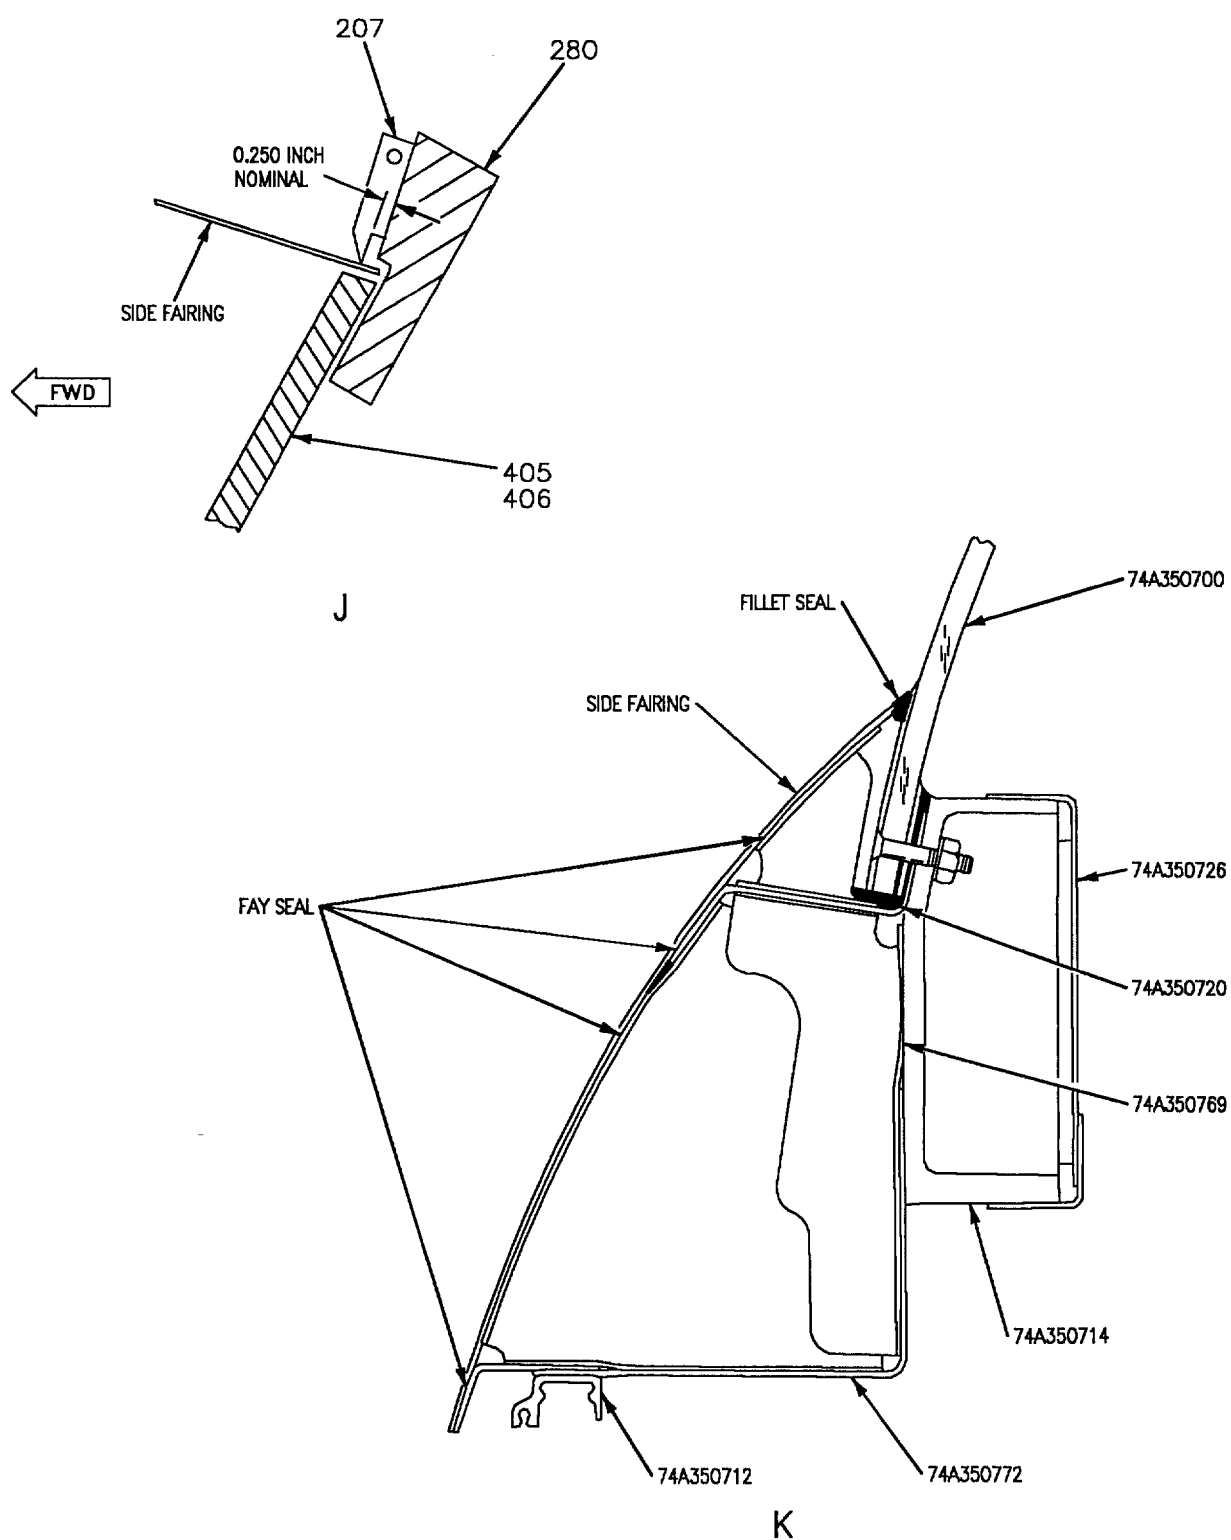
Inspection or Replacement - Side Fairing (Sheet 6)
